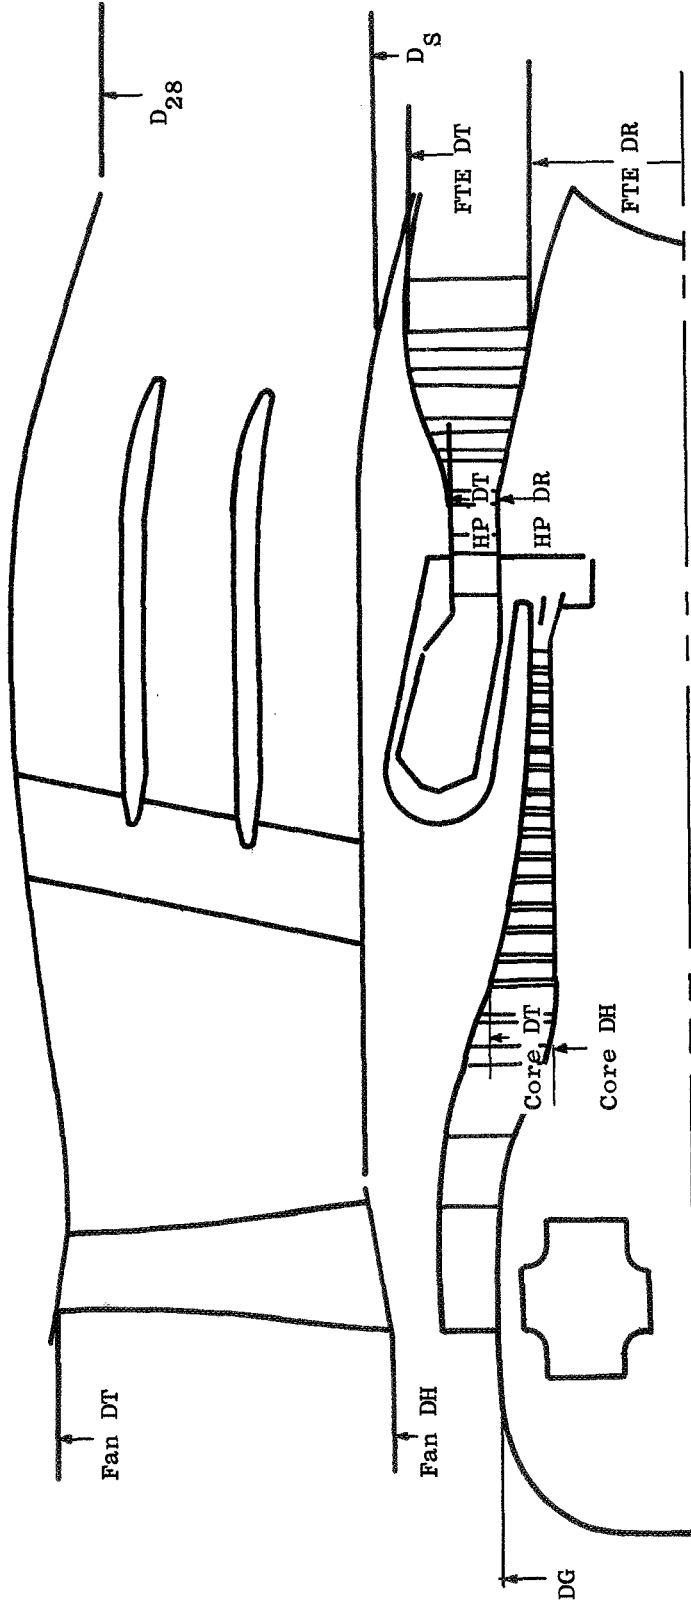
Sizing Procedures - Dimensions, Geared Configuration.
